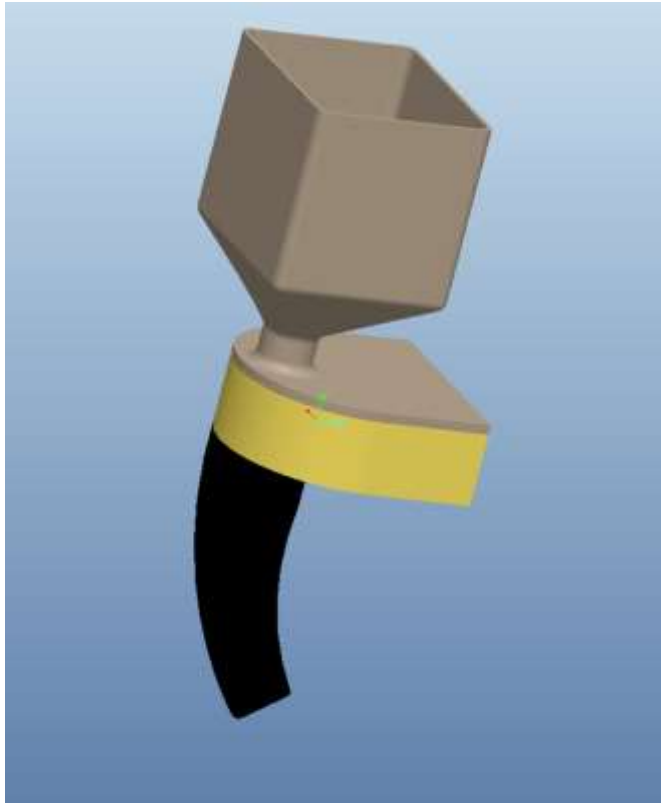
Pie Plate Design with Seed Hopper Assembled
